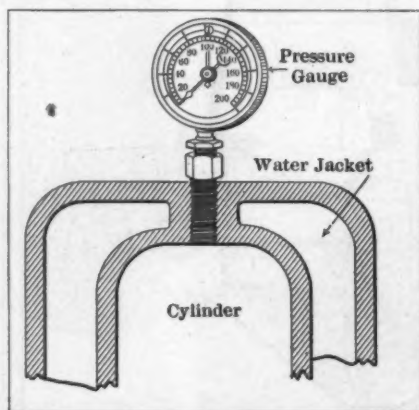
Manner of inserting the pressure gauge in spark-plug hole to measure compression
